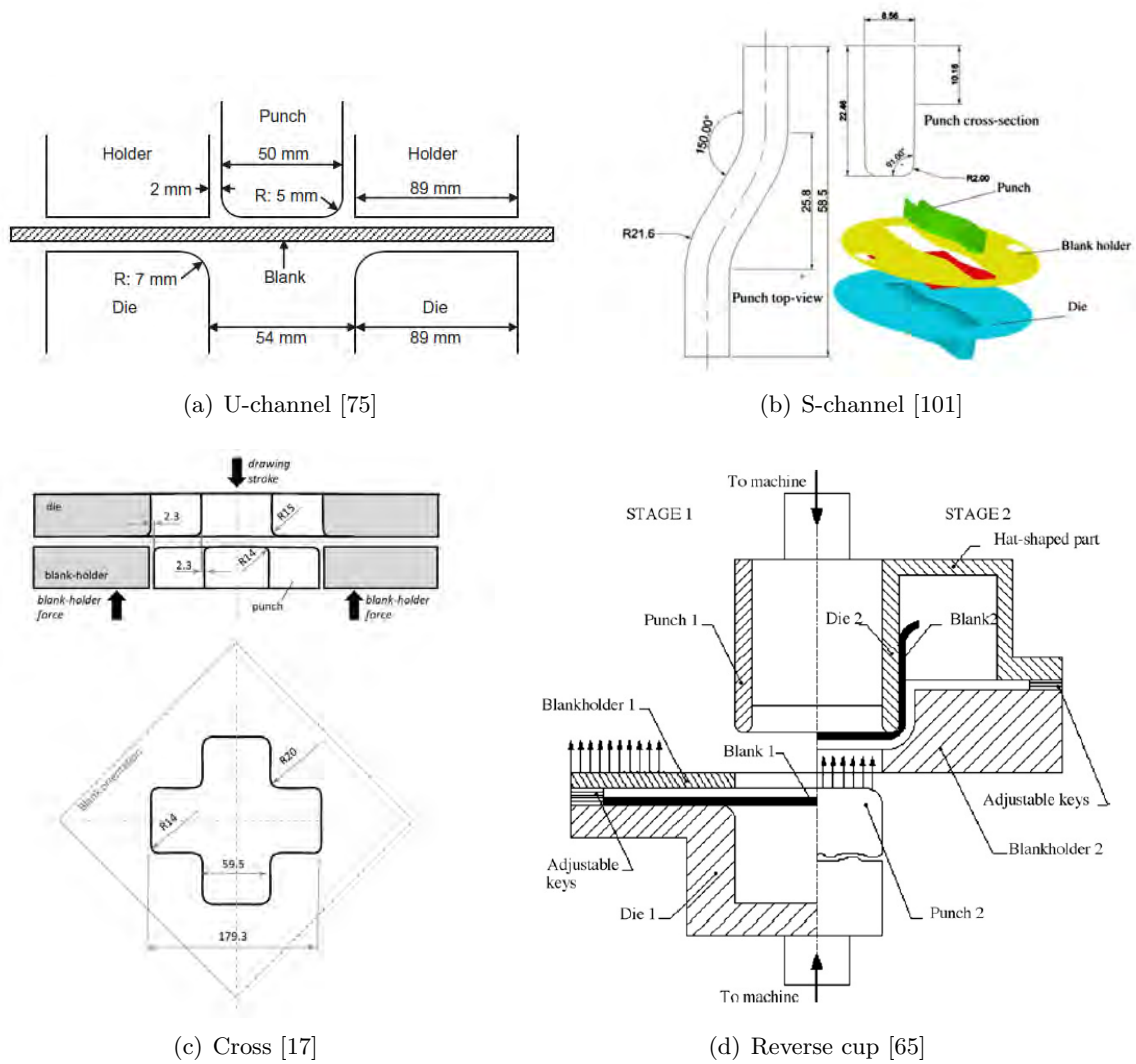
Examples of deep-drawing demonstrators which exhibits strain path changes
